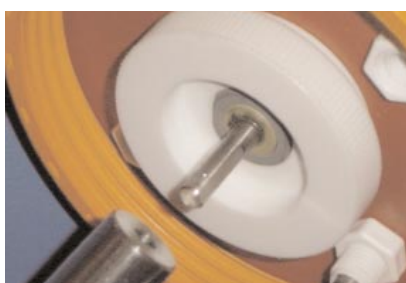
Insert drive shaft in cap assembly into the smaller opening of the coupling collar
